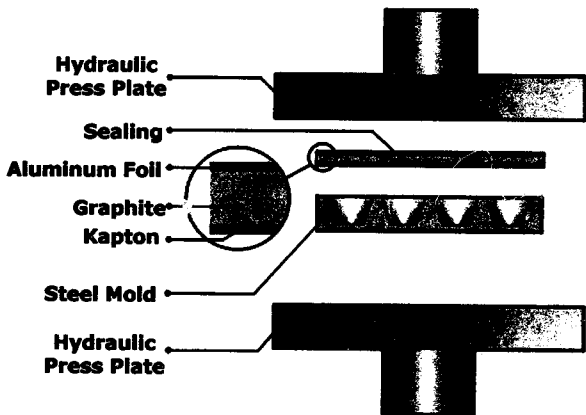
Schematic drawing of the setup for the steel mold and the gasket materials in the hot press (not to scale) [1].
